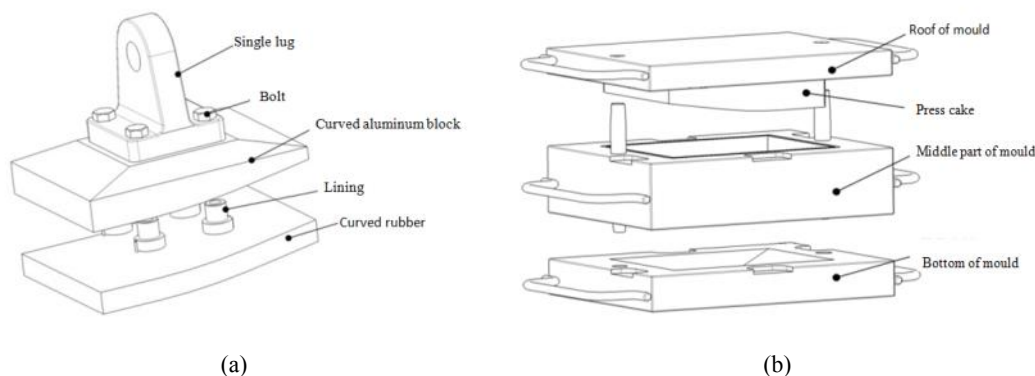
Design of surface tension-compression pad and rubber vulcanization mold (a) structure drawing of curved surface tension-compression pad (b) structure drawing of Curved surface tension-compression pad mold
